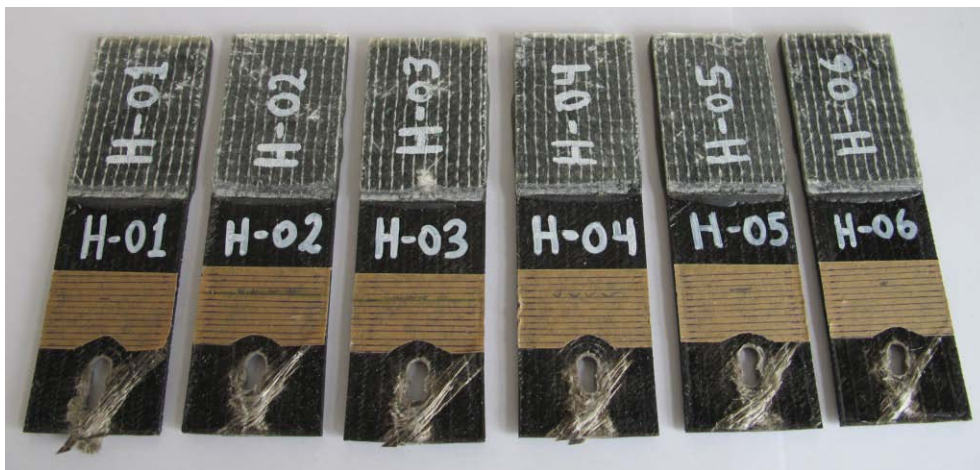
The damage mechanisms in the laminates, type H $[(\pm 45^\circ)_3]_S$, after the pin bearing strength tests, front view.
